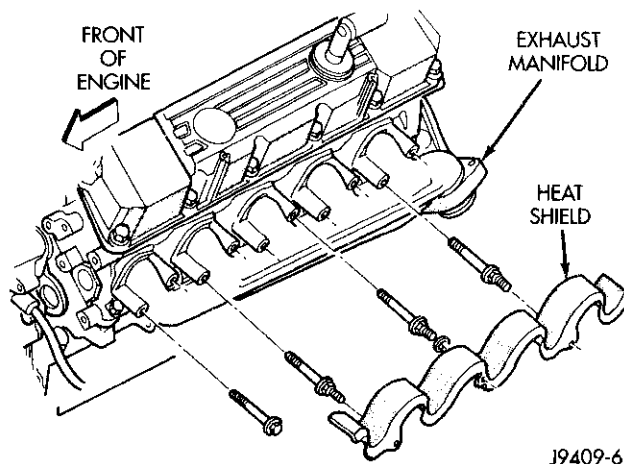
Spark Plug Wire Heat Shields (Left Side Shown)
